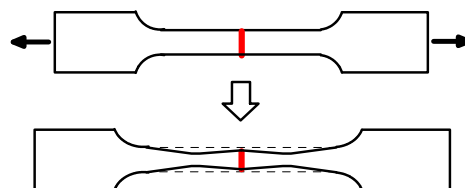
Schematic illustration of laser-welded specimen deformation in tensile test perpendicular to laser weld.
